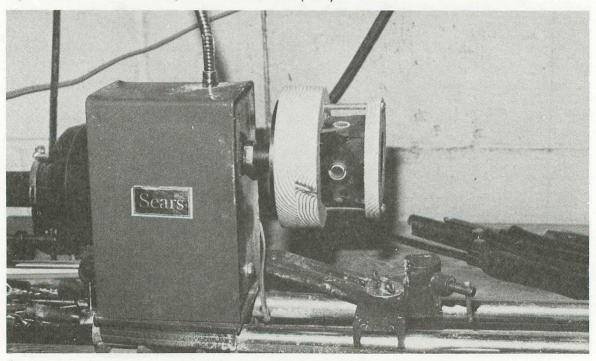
Bolts, through cover, are threaded into cup chuck. Flat-head bolts should be used.
